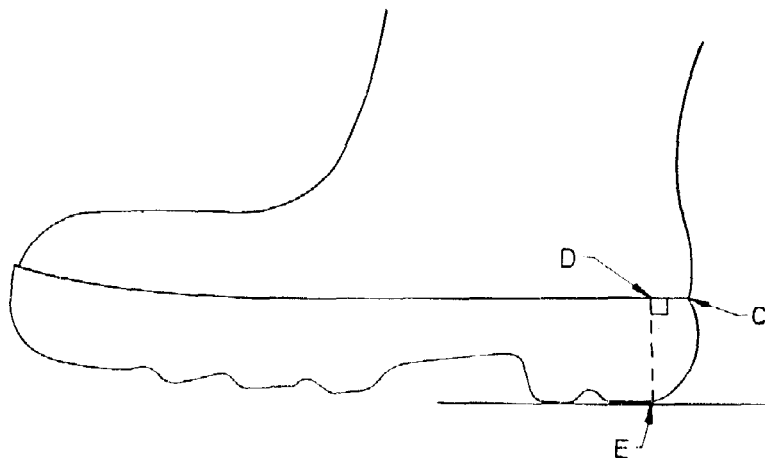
MEASUREMENT OF THE HEEL THICKNESS
